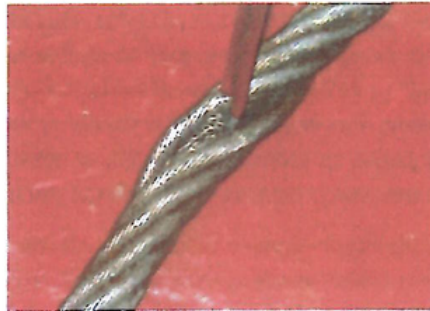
Opening a rope to inspect the inside for wire breaks can cause additional damage.
